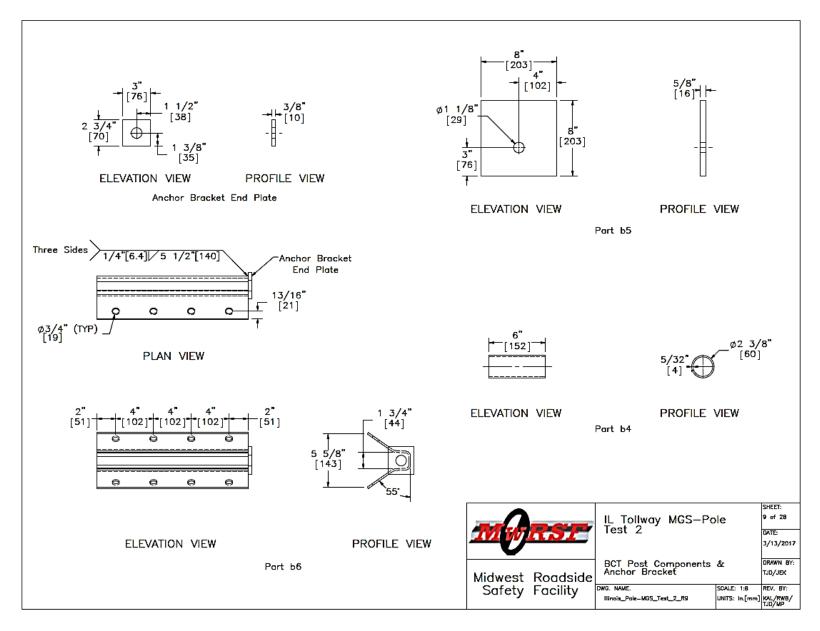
BCT Post Components and Anchor Bracket, Test No. ILT-2
